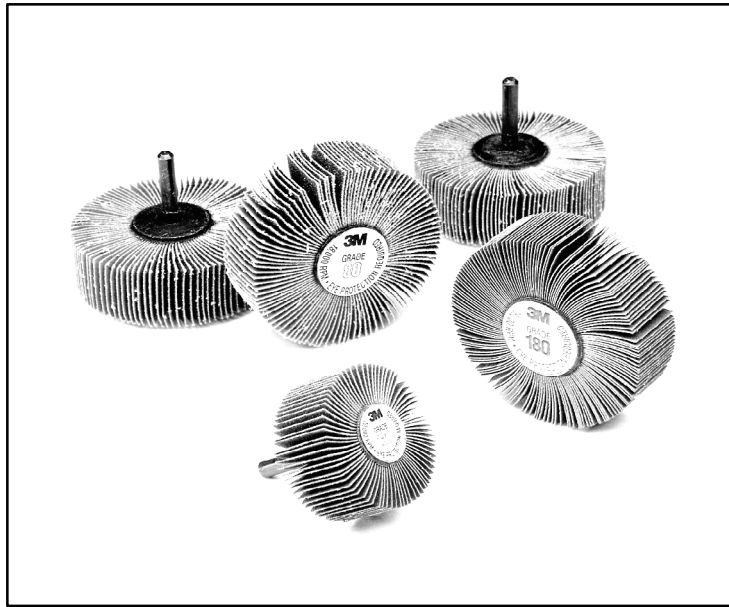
Abrasive Flap Wheels with Spindle Mount
